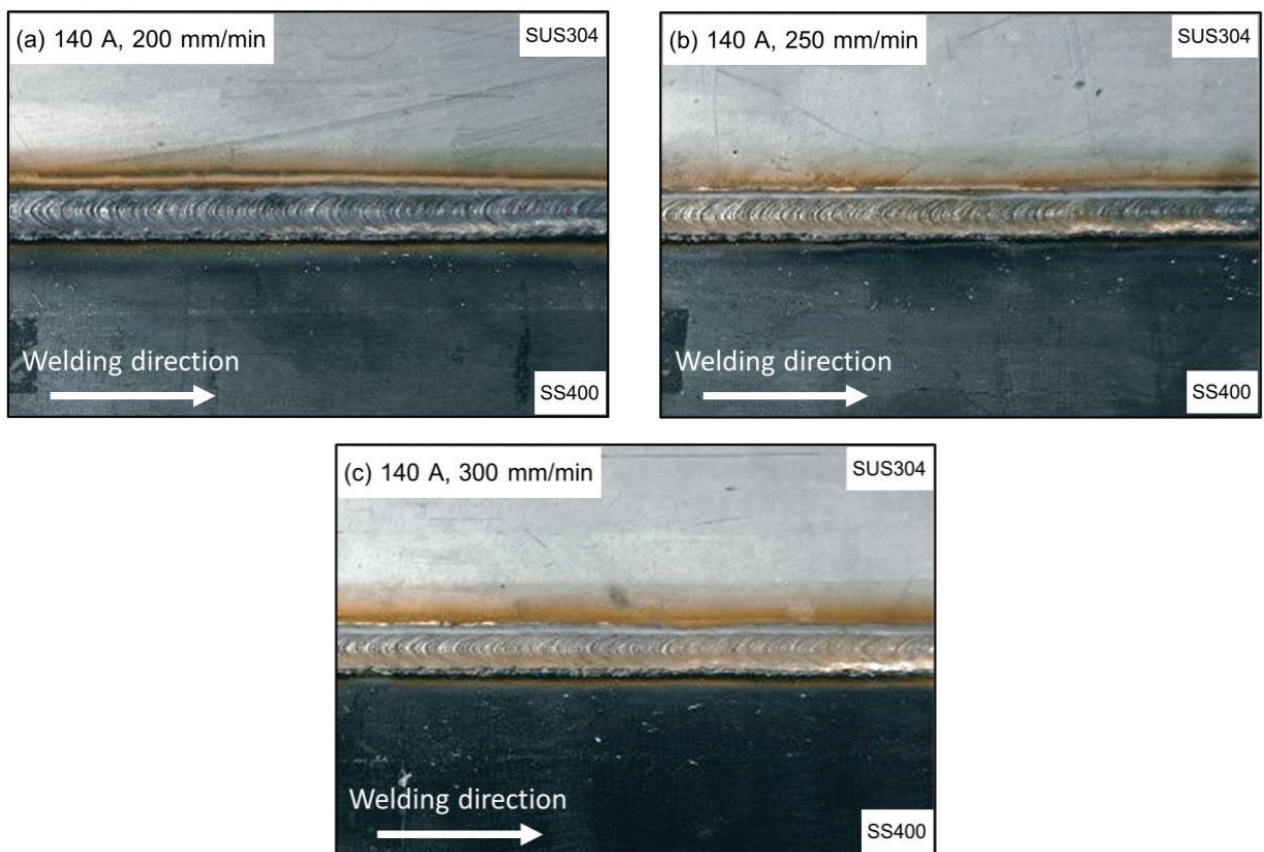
Surface characteristics of the weld seam at a welding current of 140 A and the welding speeds of (a) 200 mm/min, (b) 250 mm/min, and (c) 300 mm/min.
